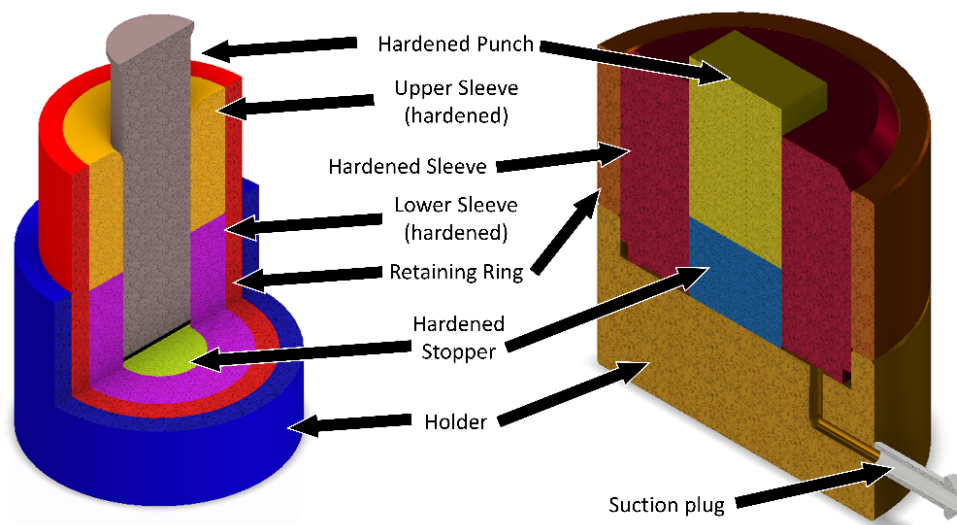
Cut view of the used die presses. On the left: Circular press tool designed by Alexander Schmitz-Wunderlich and Alexander Schug using industrial cutting bushes within their master thesis. On the right: Rectangular press tools designed by Friedrich Waag.
